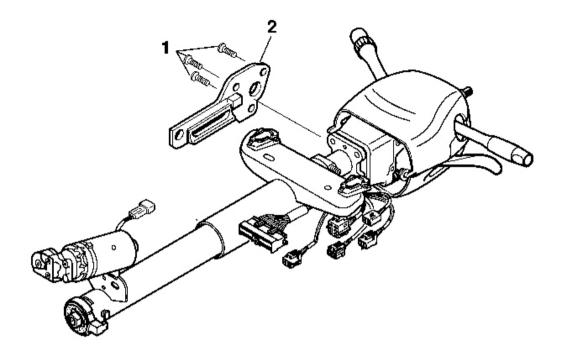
Telescope Adapter Assembly & Screws Courtesy of GENERAL MOTORS CORP.
